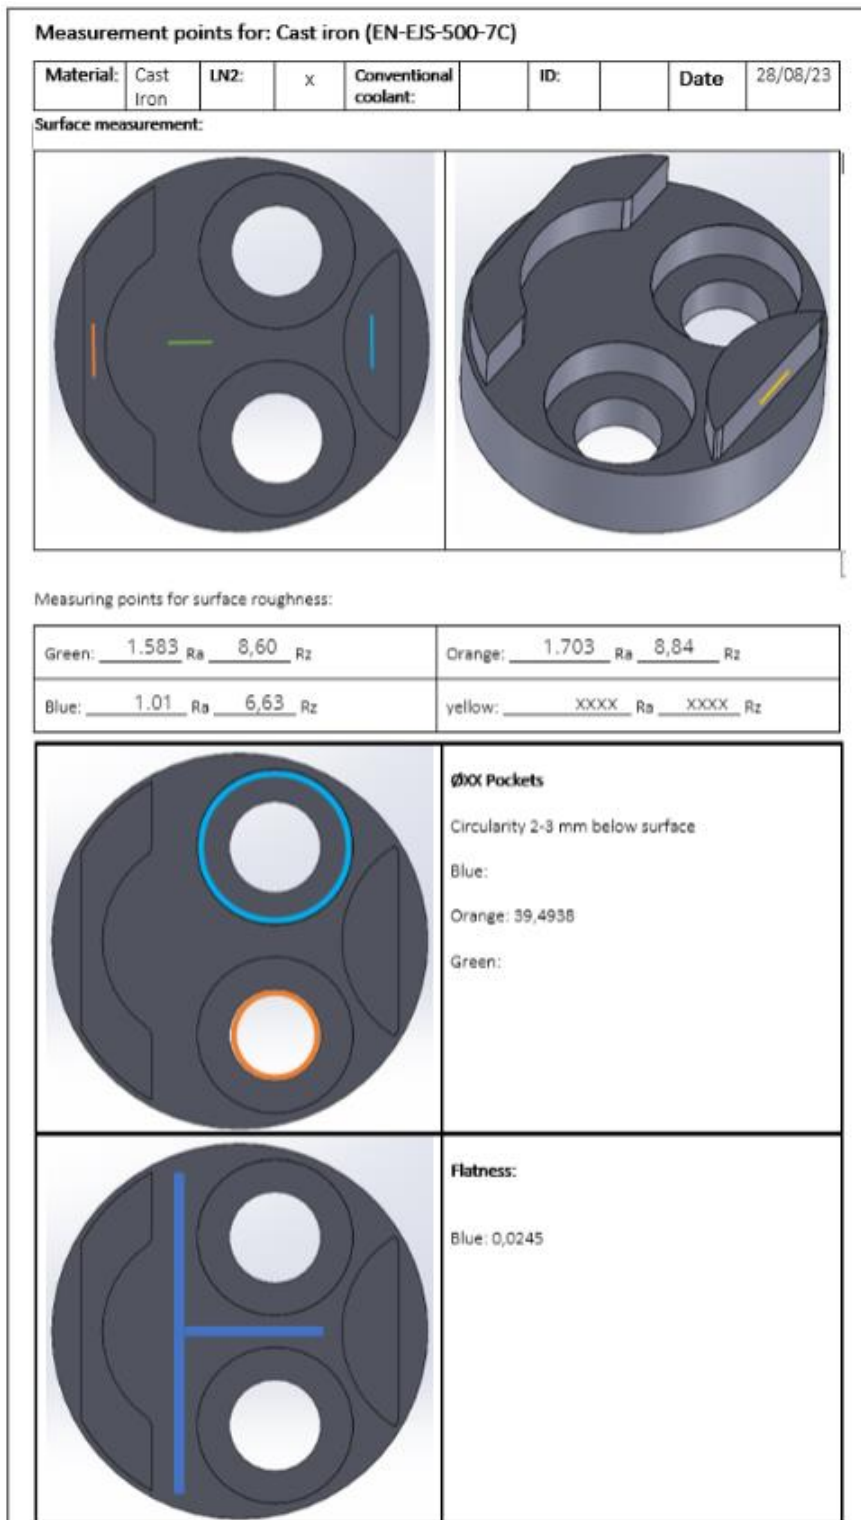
Geometrical and Dimensional Tolerance measurement – Data sheet Cast Iron-A-LN2.
